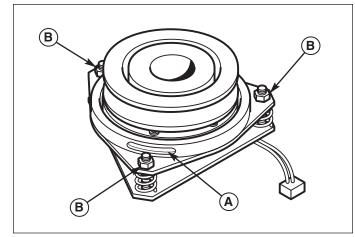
PTO Clutch Adjustment A. Adjustment Window (Qty. 3, one shown)
